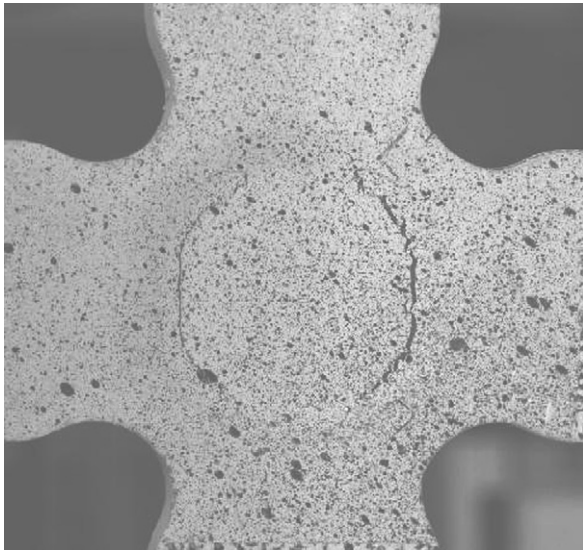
Cracks initiated at the interface between the skew edges and the flat zone of the milled area.
